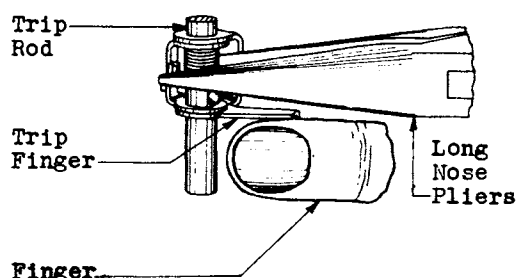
Method of Adjusting Trip Finger Back Stops
